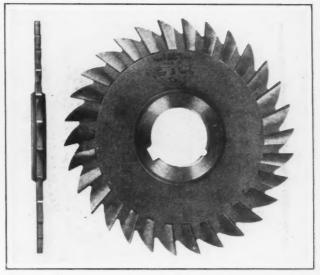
"Go & Go" Style B Side Chip-clearance Saw made for slitting Steel
